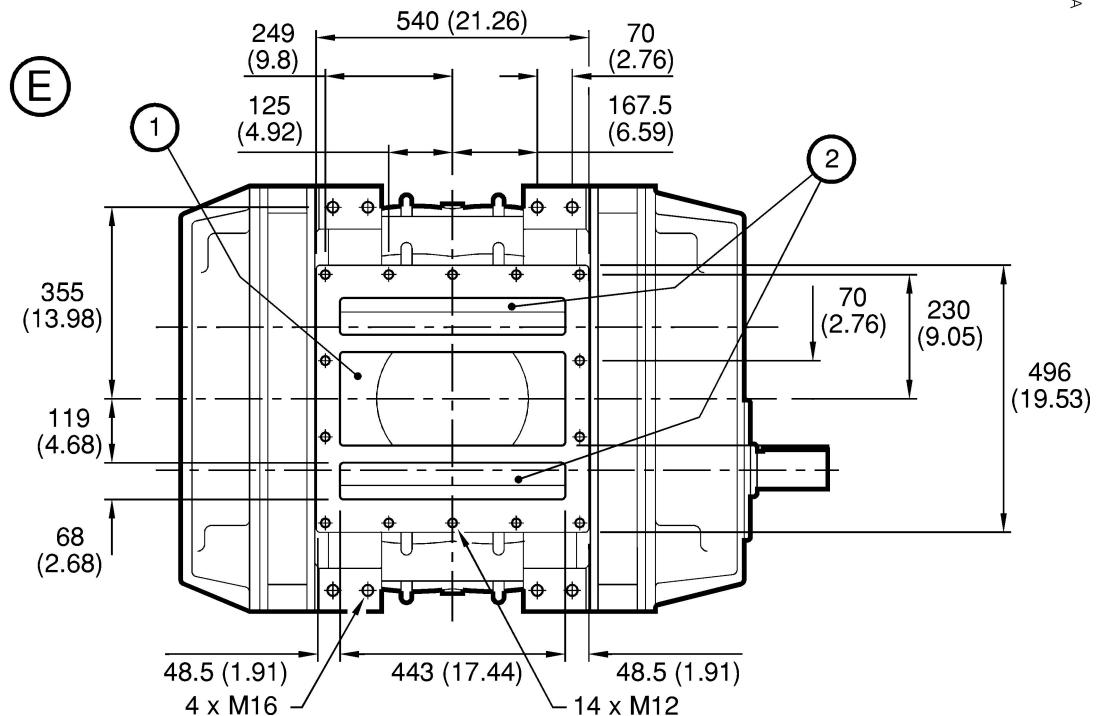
Discharge (outlet)/injection ports dimensions: mm (inch) - sheet 1 of 2
